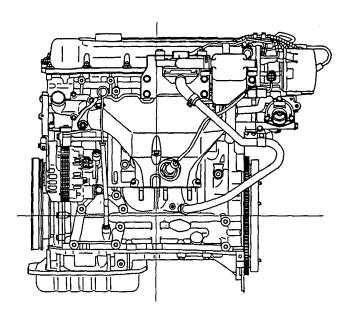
3-VIEW OUTLINE DRAWINGS
